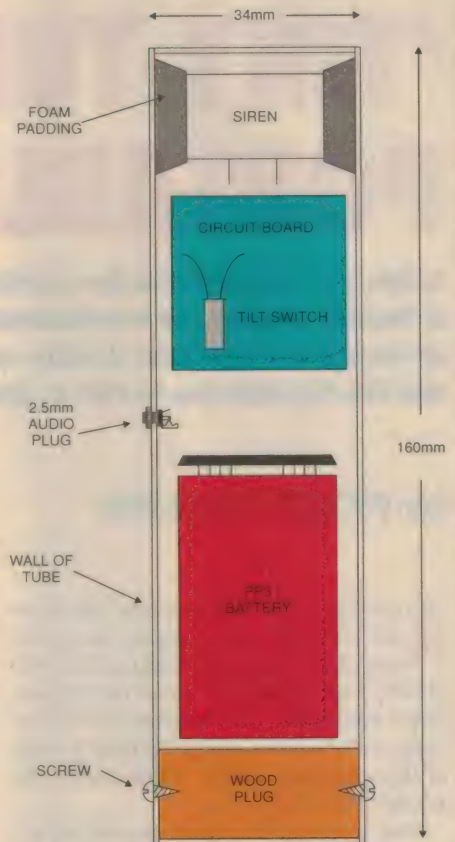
Here's how to assemble it all in the tube; Mount the siren on long leads, and fix it in place first. Then insert the board, socket and battery, and hold it all in place with some foam packing and the wooden plug.
